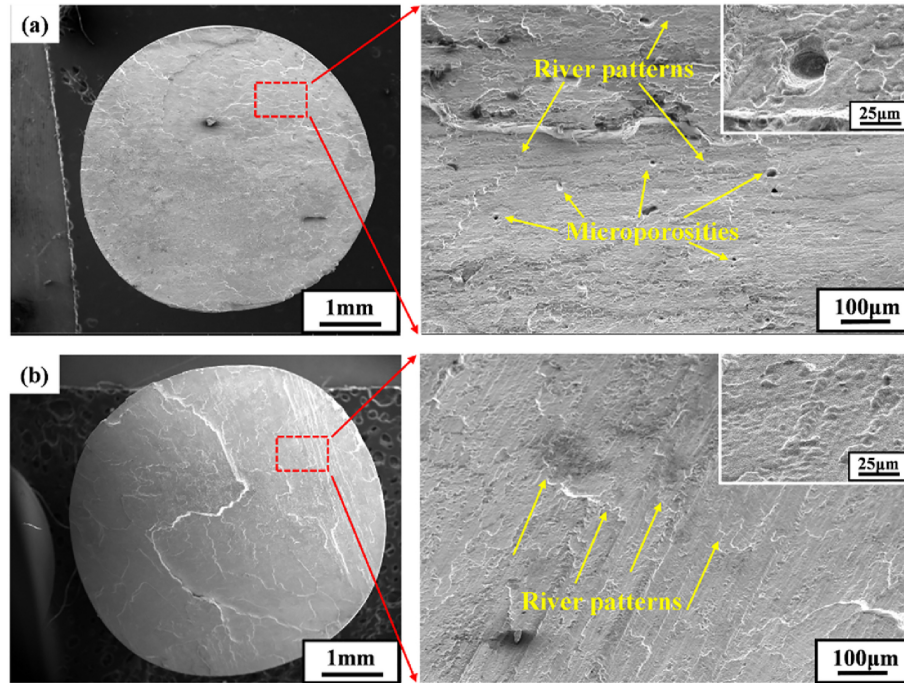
River patterns on a cleavage fracture surface [14].
